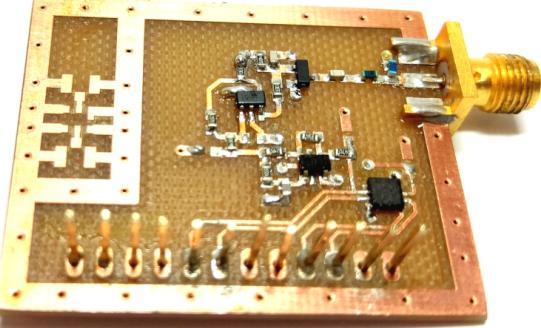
Assembled wake-up receiver with the presented DBB on 1.55 mm thick printed circuit board (PCB).
